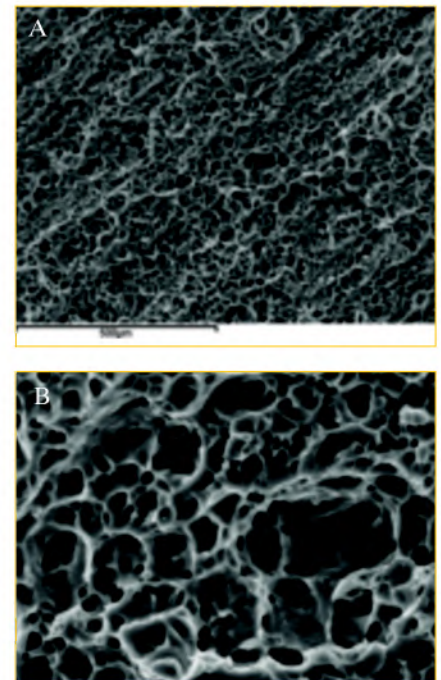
SEM micrographs of UNS21800 to UNS15500 inertia weld fracture. A — 1000 \times ; B — 5000 \times . Note ductile rupture fracture mechanism.
